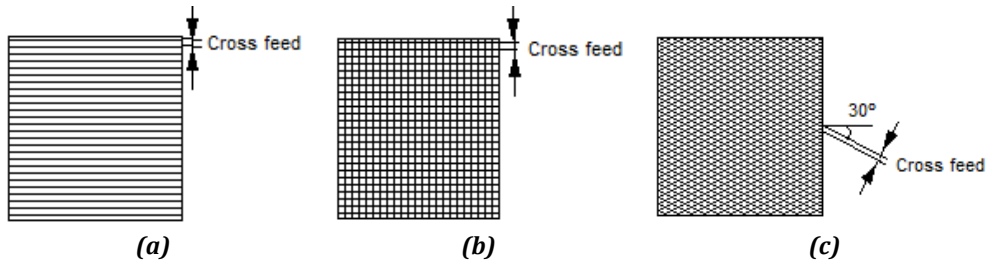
Tool path strategies: (a) roughing tests; (b) RKE type knurl; (c) RGE type knurl.
